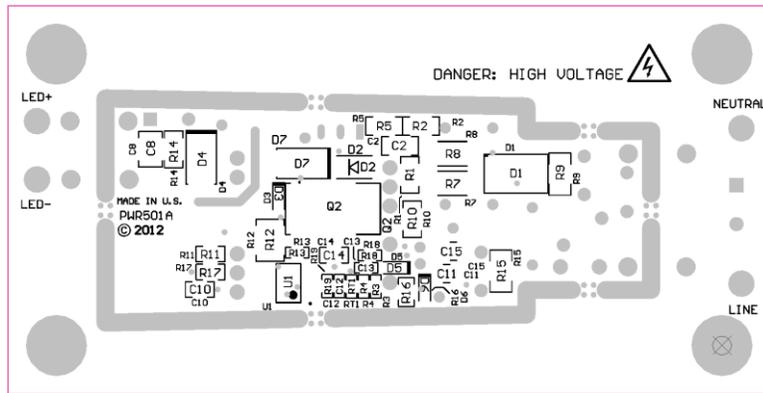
LM3447-PAR-230VEVM Bottom Assembly Drawing (bottom view)
